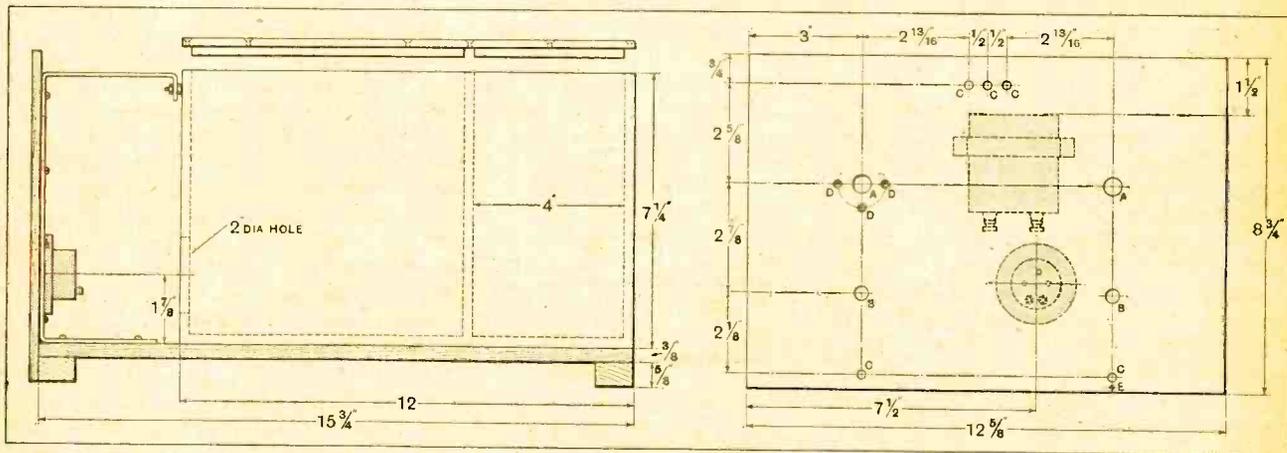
Overall dimensions of baseboard, screening box and front panel with drilling details for the latter. A, 1/2 in. dia.; B, 3/8 in. dia.; C, 1/4 in. dia.; D, 5/32 in. dia. countersunk for No. 4 B.A. screws; E, 3/32 in. dia.
